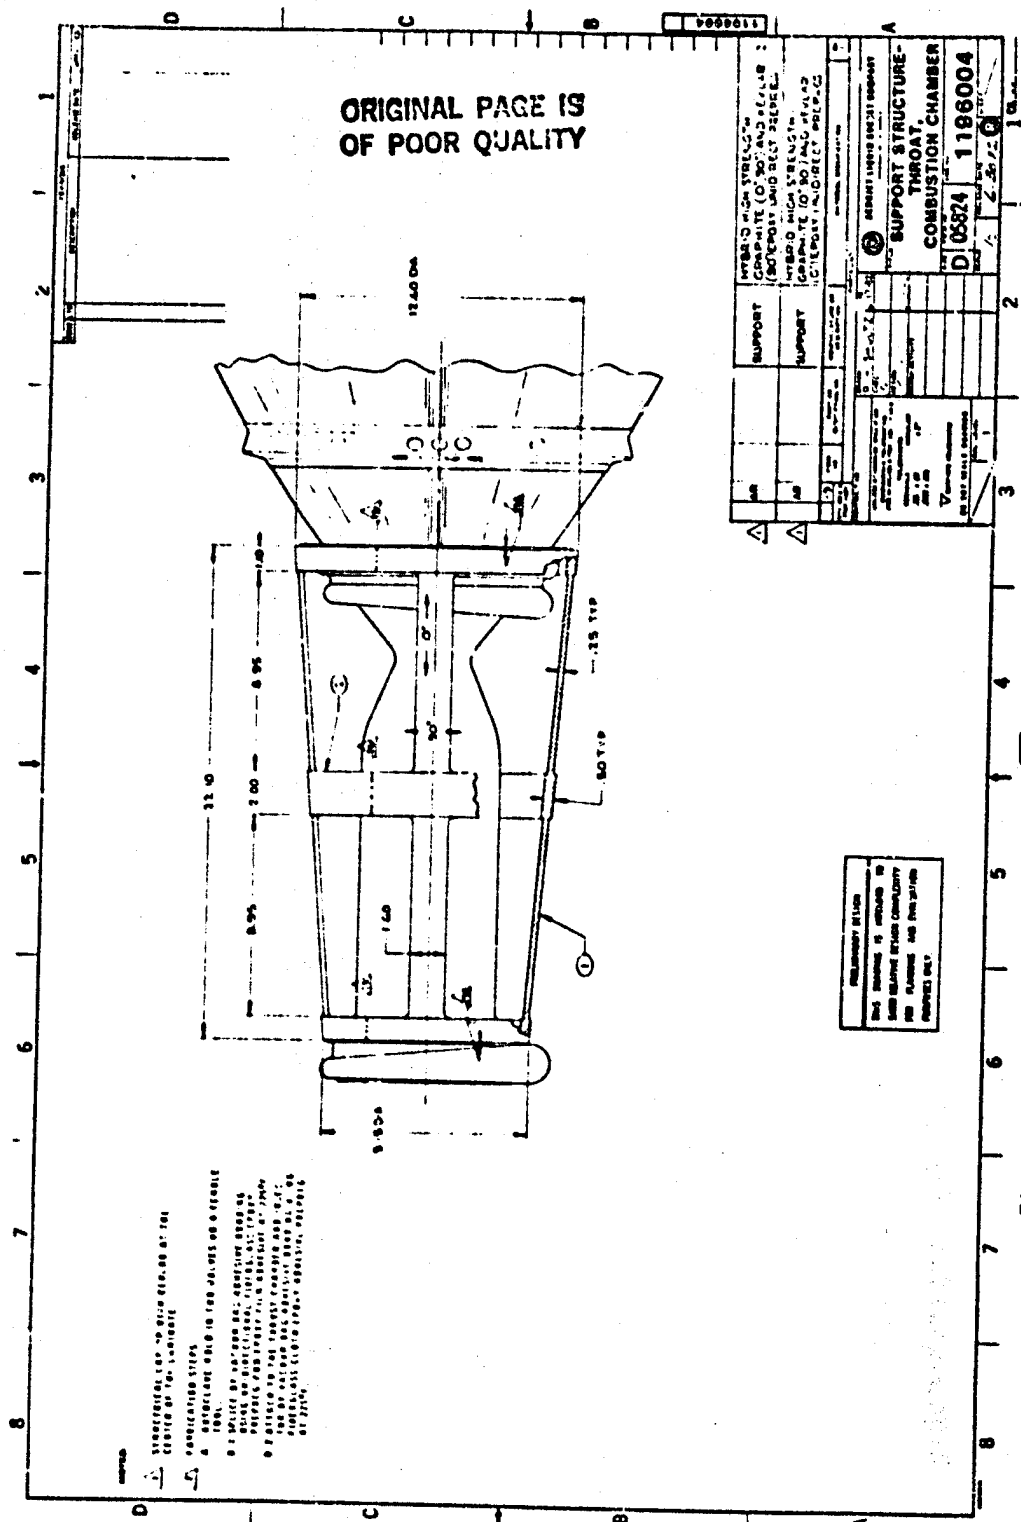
Support Structure - Throat, Combustion Chamber (ALRC Drawing No. 1196004)
